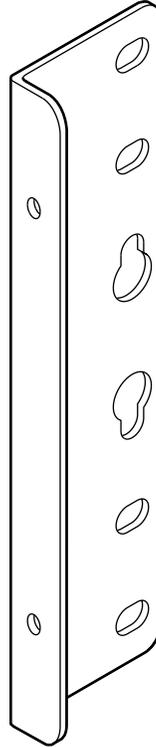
shows the ETSI mounting bracket for Optical Metro 5100 shelves.
